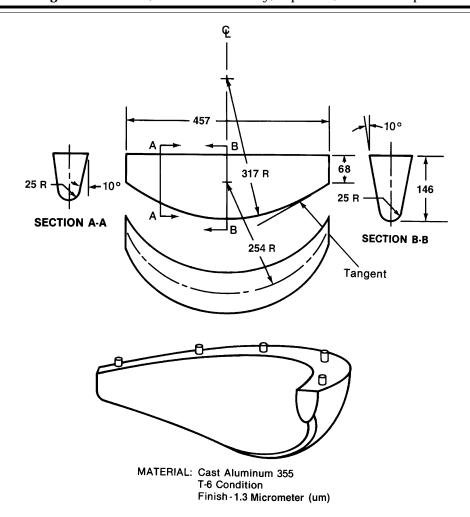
Diagram of Bead Unseating Block—Dimensions in millimeters (mm)
